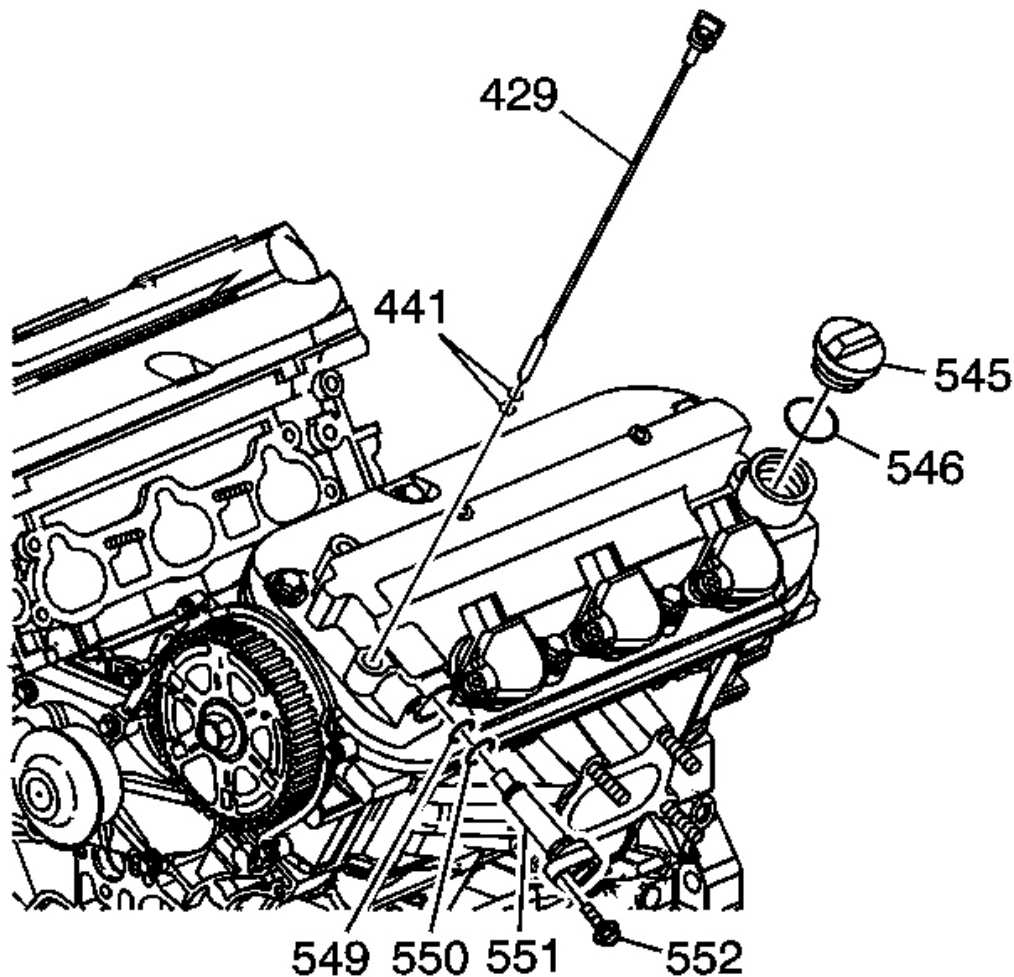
Identifying Oil Level Indicator, O-rings, Positive Crankcase Ventilation, Valve, Bolts & Cap
